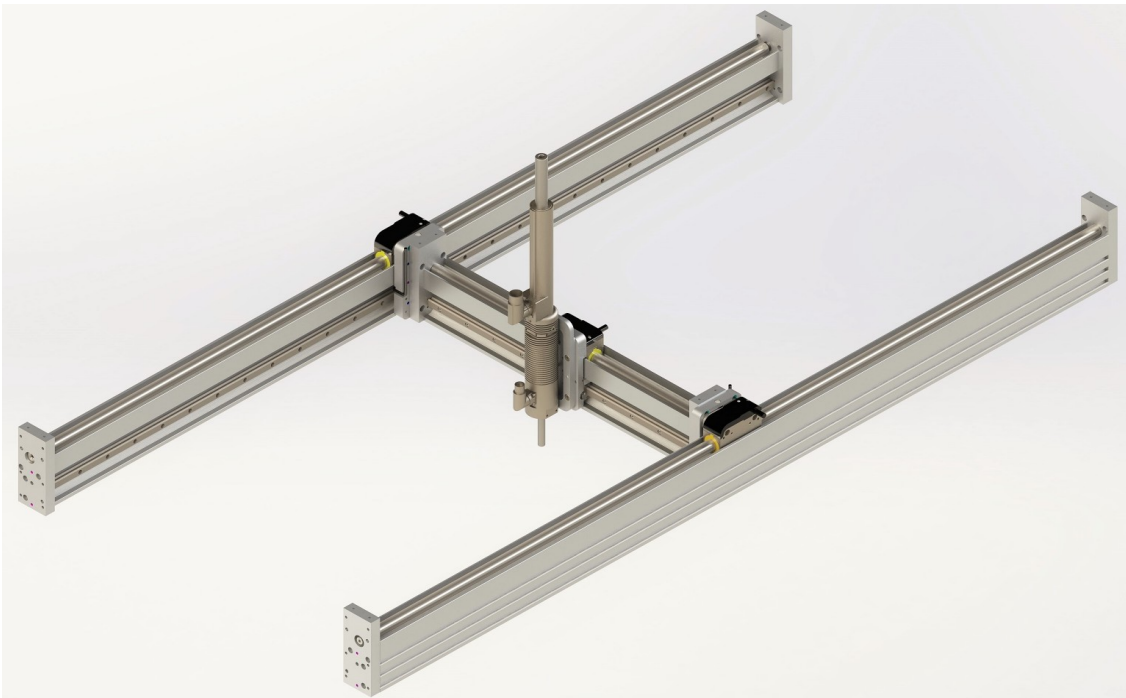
Gantry Design with mounted linear rotary motor PR01-52
